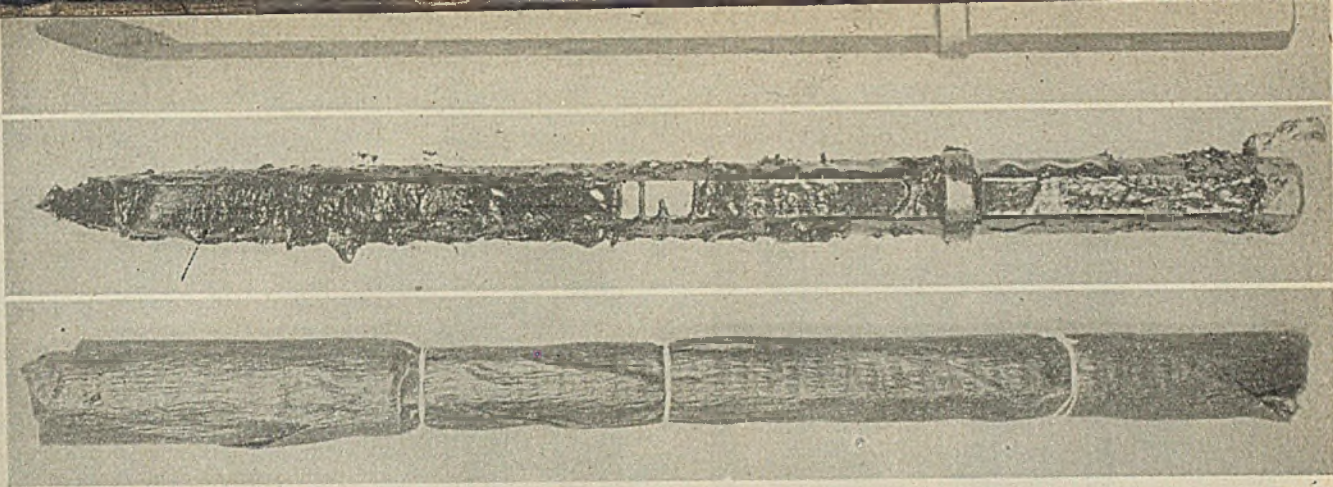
Chisel for pneumatic tool is first dipped in hot corrosion preventive compound and then wrapped as shown in special paper
